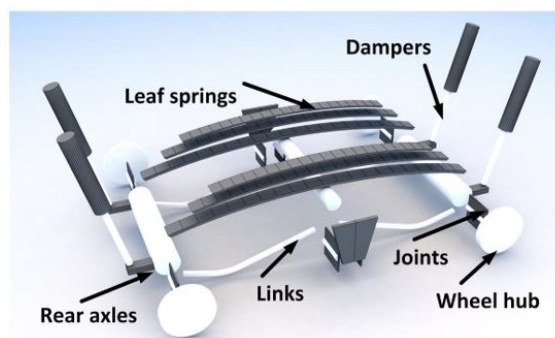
Physical system analysis (hardpoints, parts and joints)
